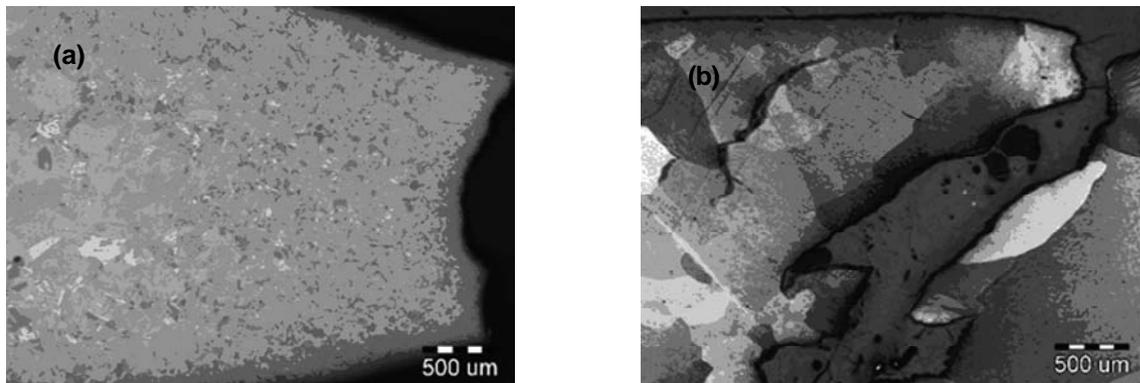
Fracture of B30 and HS201 welding joints at room temperature: a) B30 welding joint; b) HS201 welding joint.
